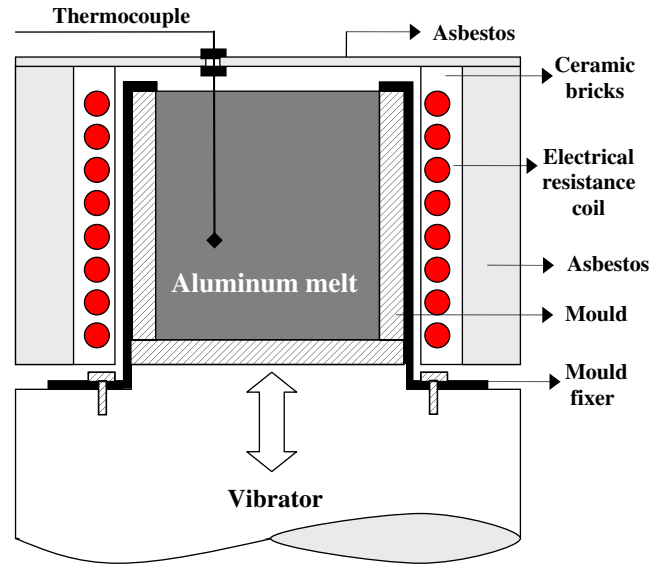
Schematic view of made system and equipments setup used in experiments.
